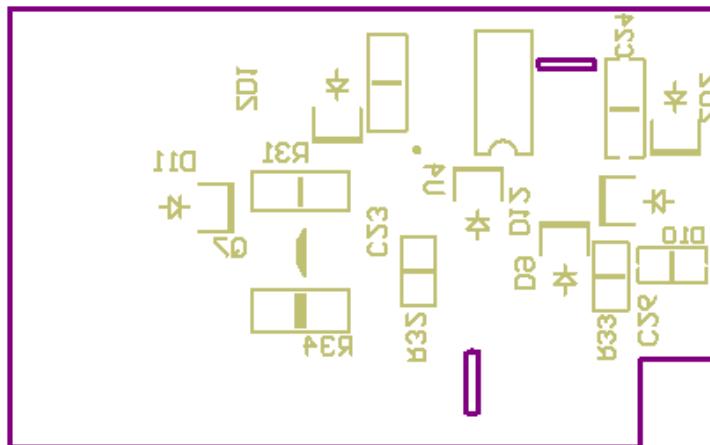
Evaluation Board Layout (Daughter Card), Bottom Overlay
